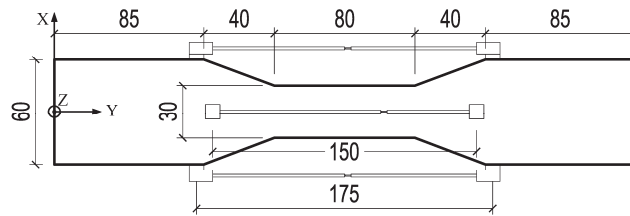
\_ SType1 specimen geometry (dimensions in mm)
